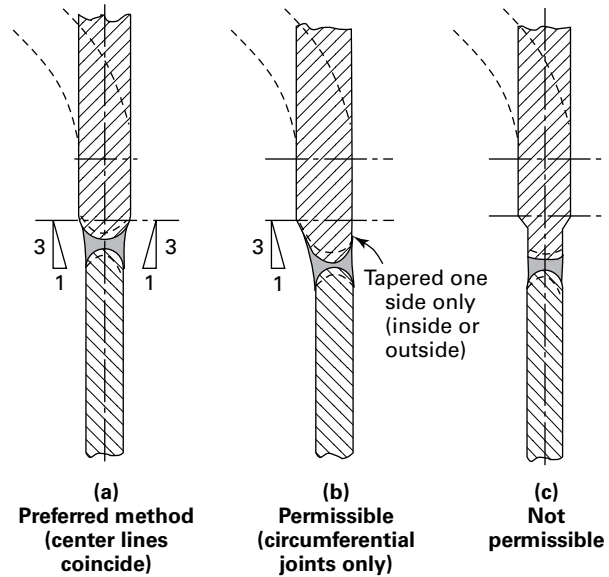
BUTTWELDING OF PLATES OF UNEQUAL THICKNESS
